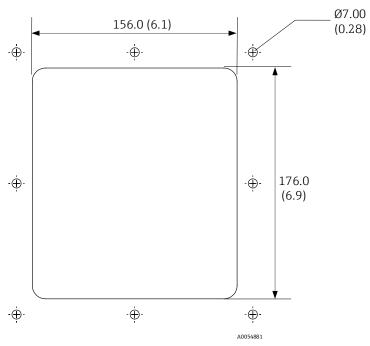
Enclosure mounting cutout. Dimensions: mm (in)
